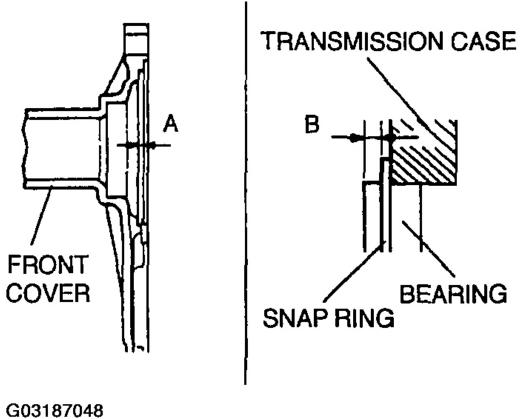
Identifying Dimensions A & B Courtesy of MAZDA MOTORS CORP.
